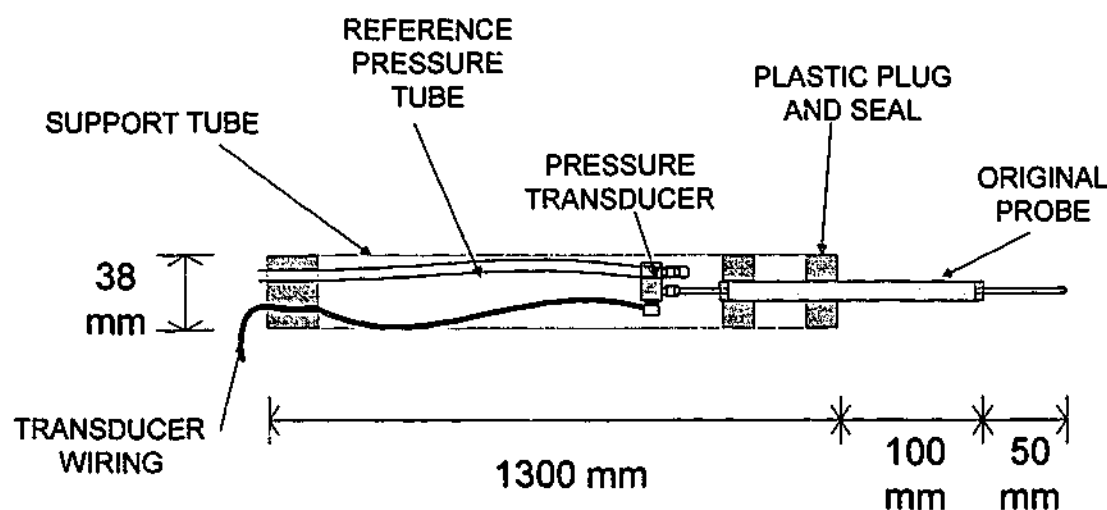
"Scaled-up" probe assembly used for experiments in the 1560 mm bed. The same probe design that was used in the smaller beds was supported in a 38 mm OD tube for insertion into the large cold model. A nylon tube fed air to the reference side of the pressure transducer.
